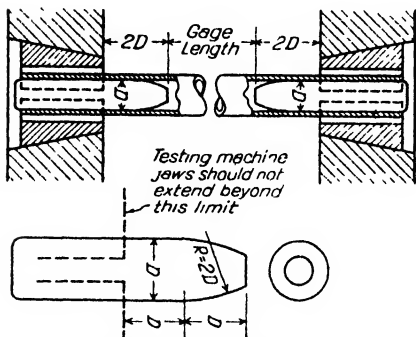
Tension specimen for metal tubing ranging in size up to about 2 in. outside diameter but particularly for sizes 1 in. outside diameter and less. For larger sizes cut-out specimens as shown in Fig. 4, for thin wall tubes and as shown in Fig. 1 or 2 for thick wall tubes may be used.
